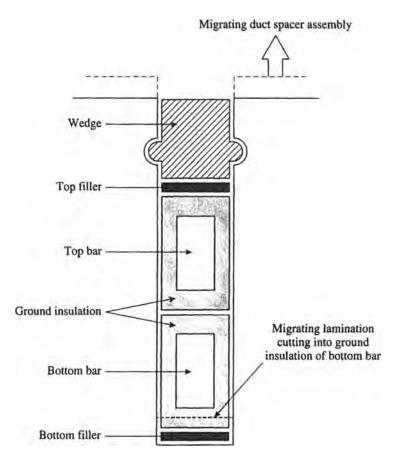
[S38] Cross section of slot showing migration of duct-spacer assembly.
